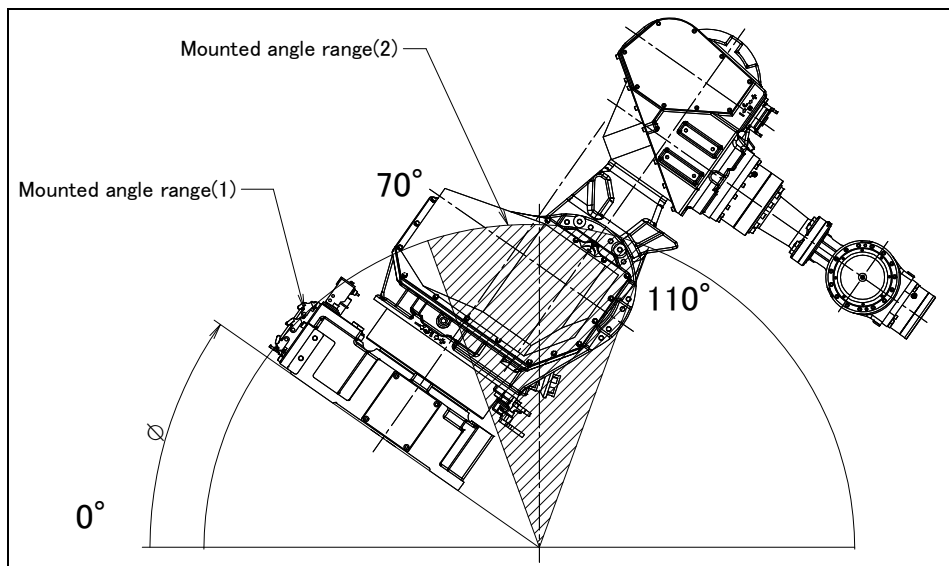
(j) Mounted angle (M-710iC/50S)
